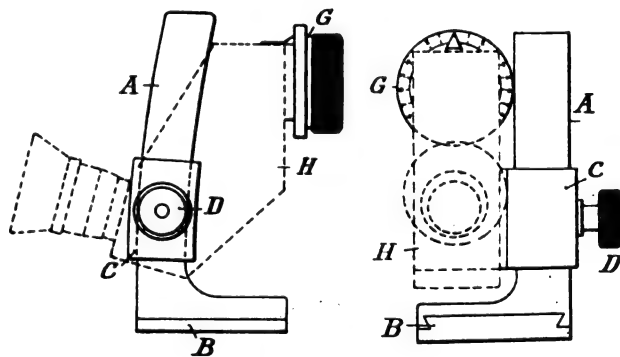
Prism telescope sight on elevating arc with lateral correction to object glass for windage.
